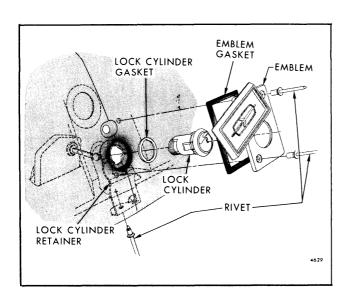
Typical Swivel Emblem - Rivet Retained - Oldsmobile "B" Style Shown
